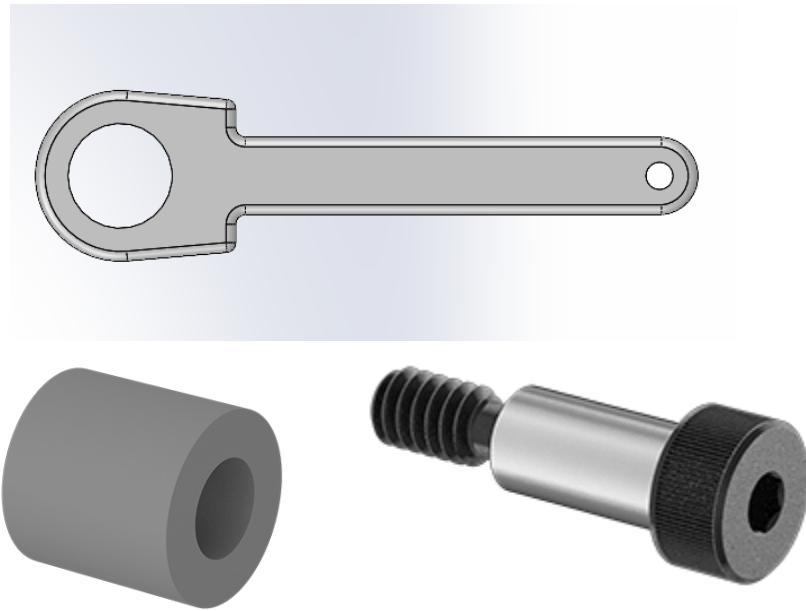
3D printed link (top), Rulon J sleeve bearing (bottom left), shoulder bolt (bottom right).
